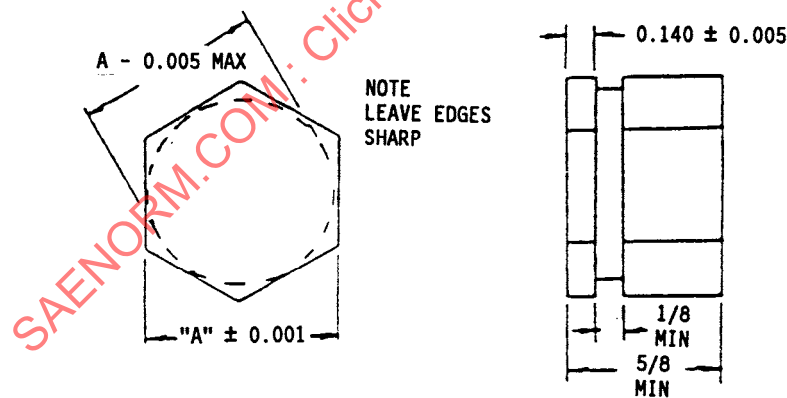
SPECIMEN FOR ALUMINUM MANDREL TEST
